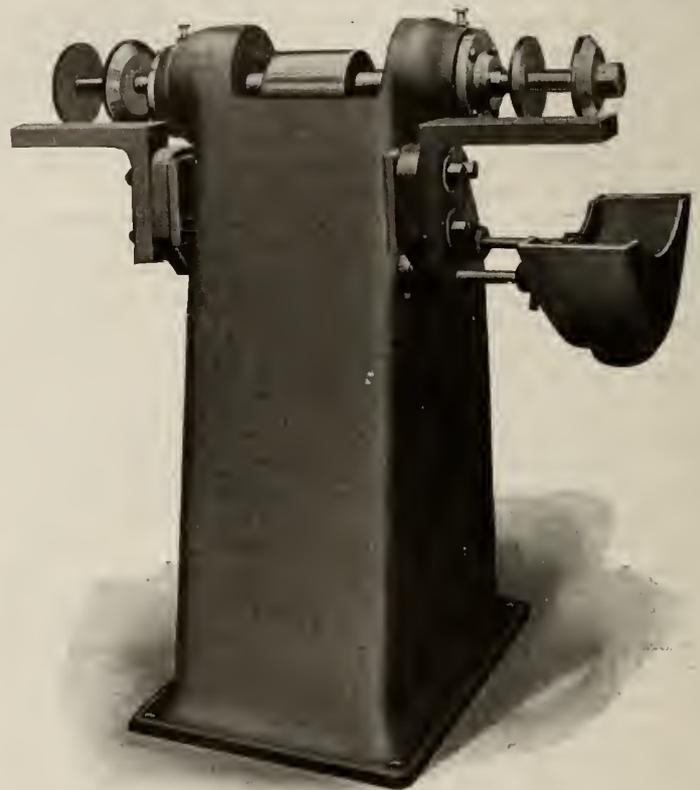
GRINDING MACHINE WITH BALL BEARINGS.
